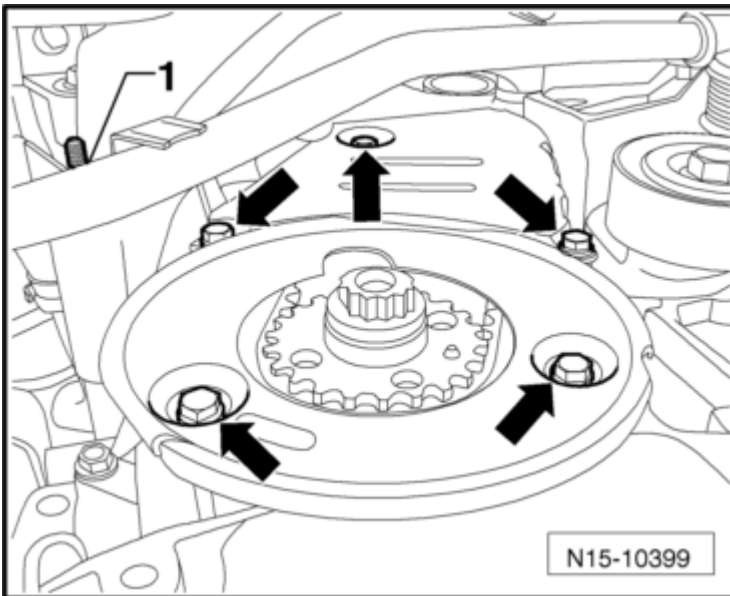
Identifying Lower And Center Toothed Belt Guard Bolts -Arrows-
